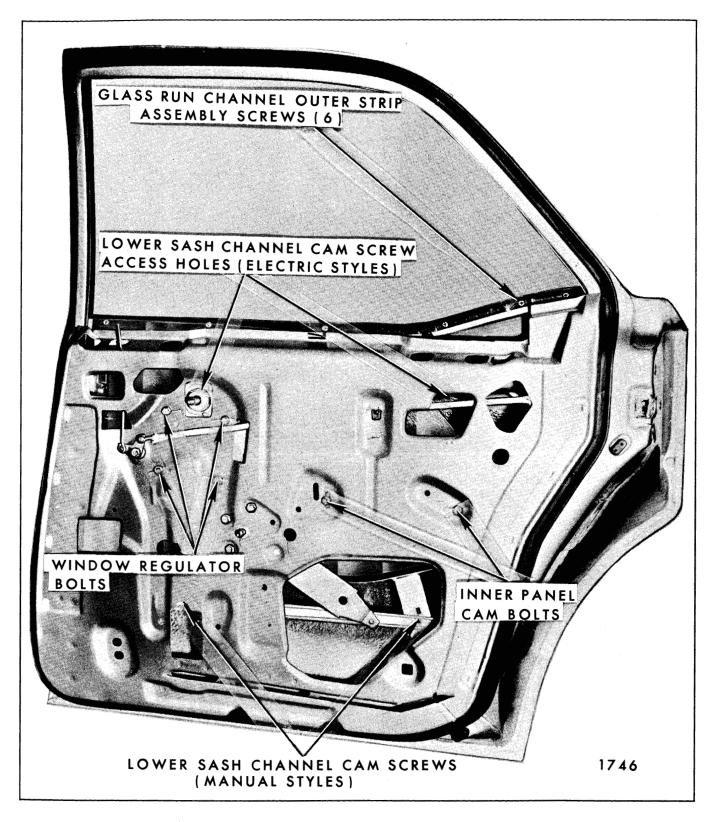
Window Regulator Removal - "B" Closed Styles
